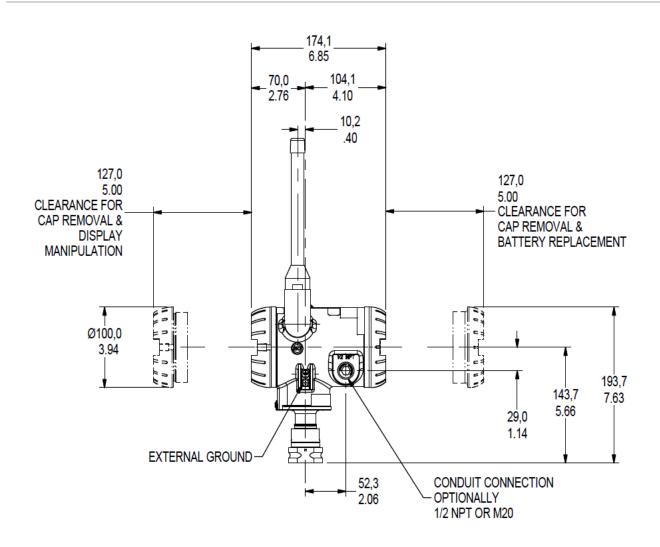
In-Line Gauge, Informational and dimensional drawing
